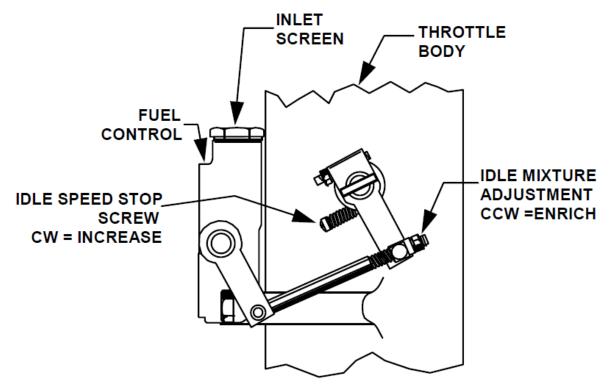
Throttle and Control Assembly Side View (All GTSIO-520 except GTSIO-520 -C, F & K
